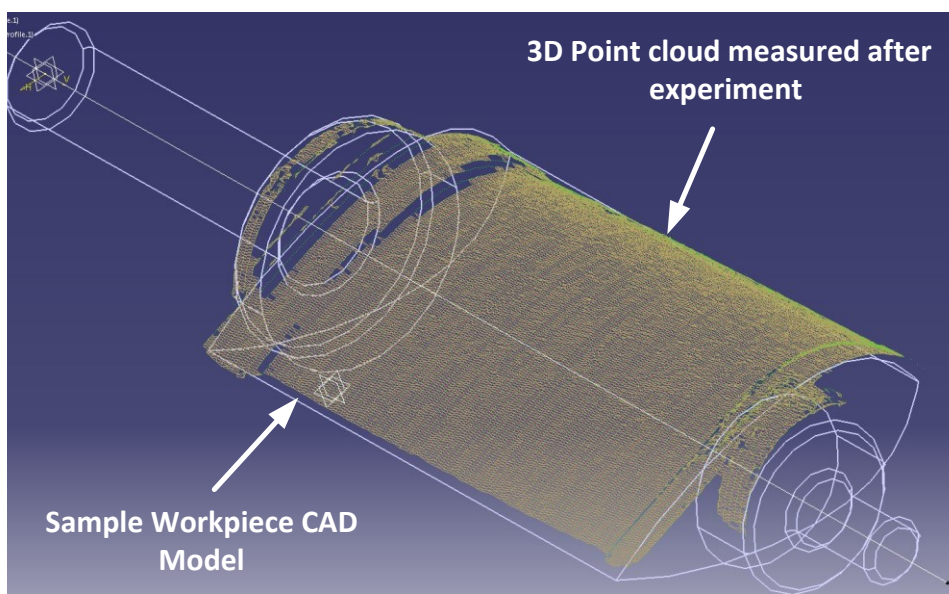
MRR measurement using 3D point cloud and CAD model
